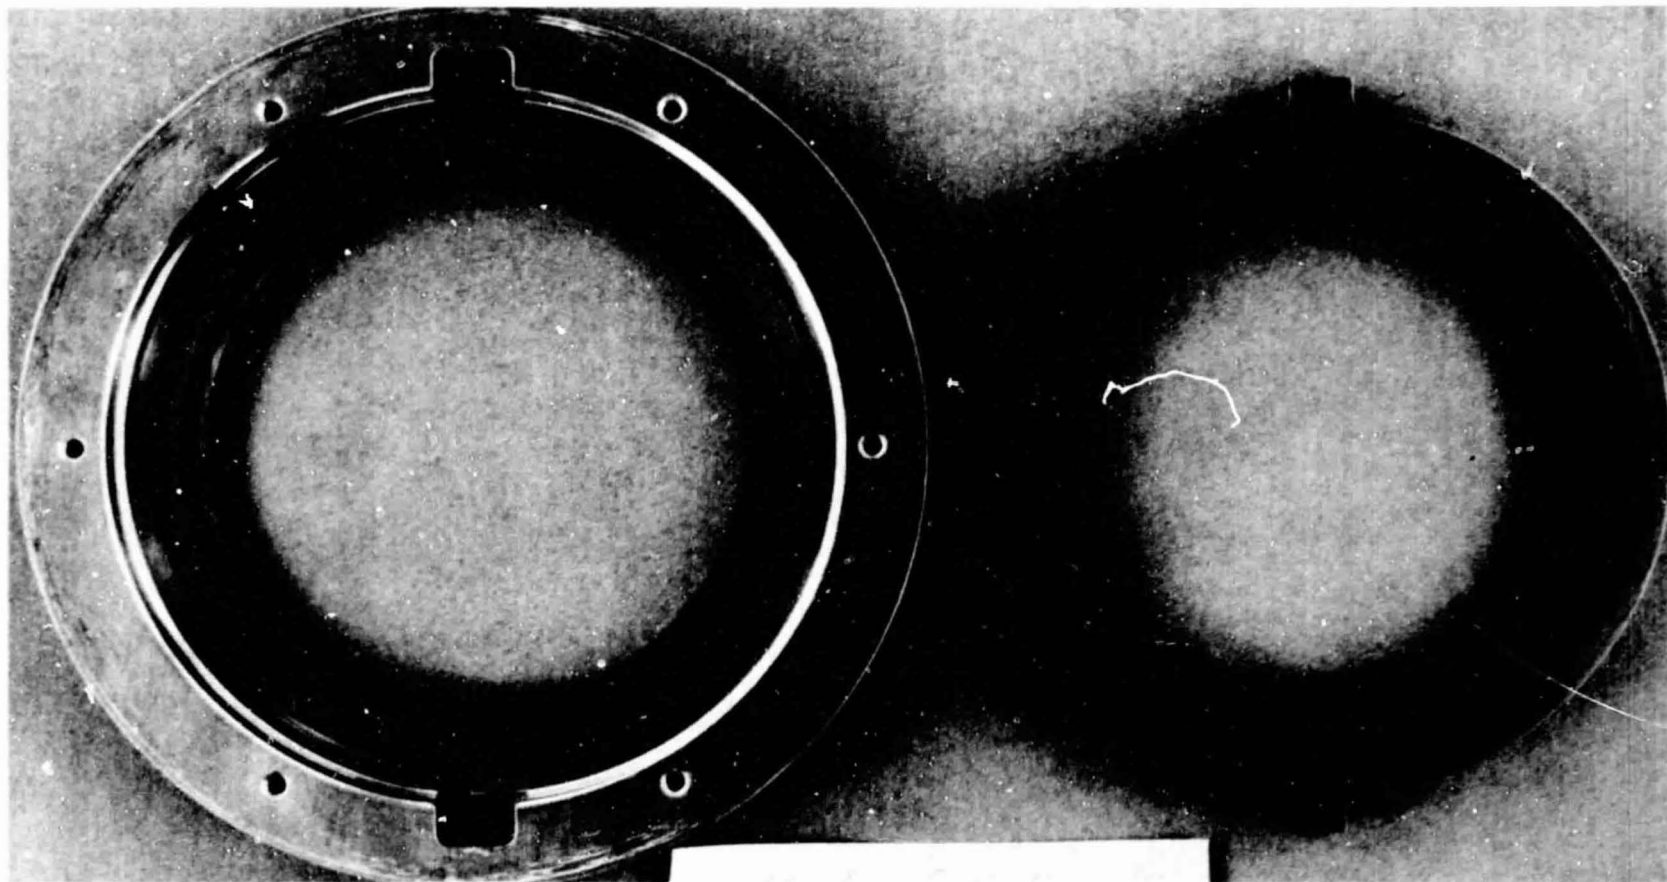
Pump End Secondary Seal, P/N 7R0011526, S/N 047909, Build 15,
